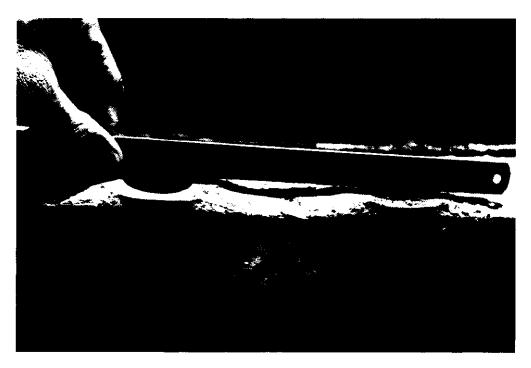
, View showing wastage of fractured outer slewing ring race between the stud holes
